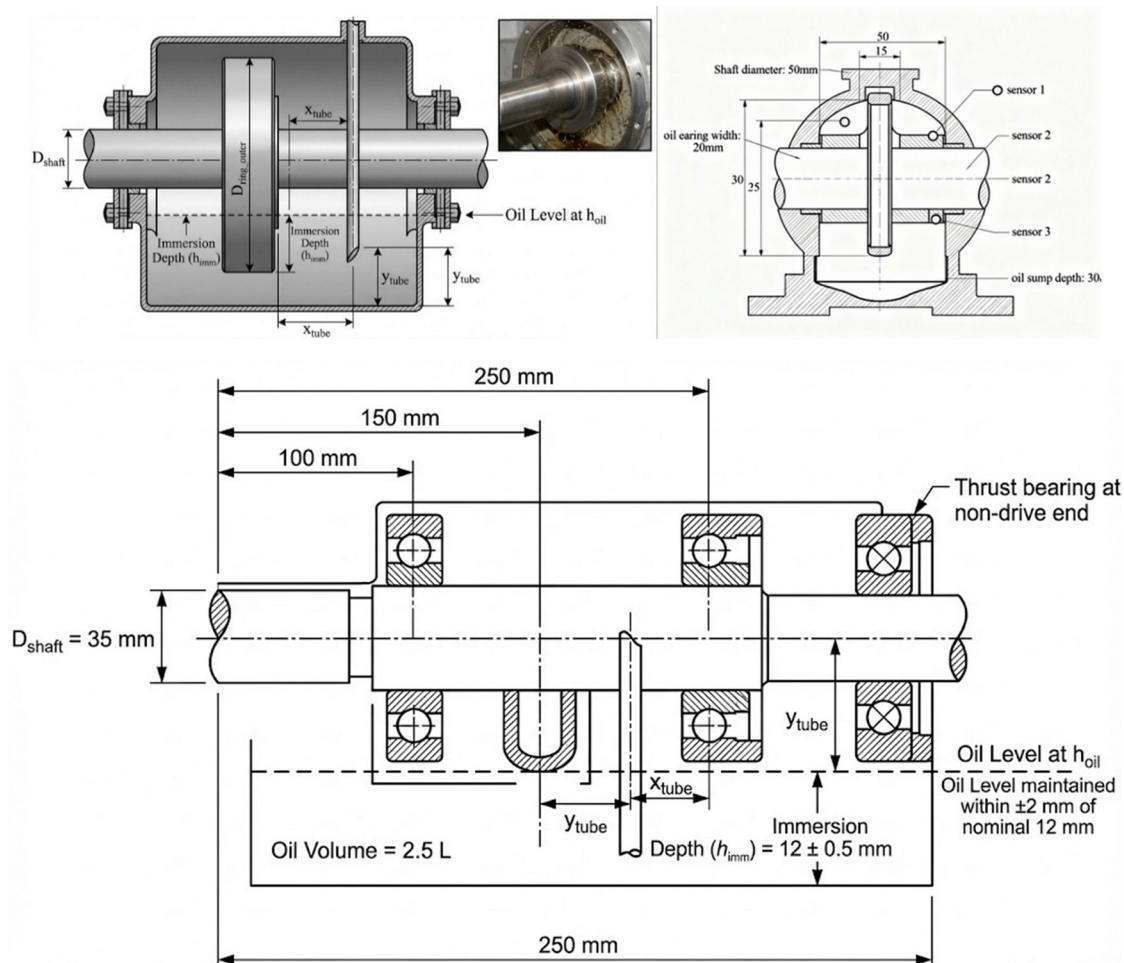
Schematic of the oil splash ring test rig showing shaft, bearings, composite ring position and integrated oil sump for ISO VG 68 mineral oil at 3000 rpm.
